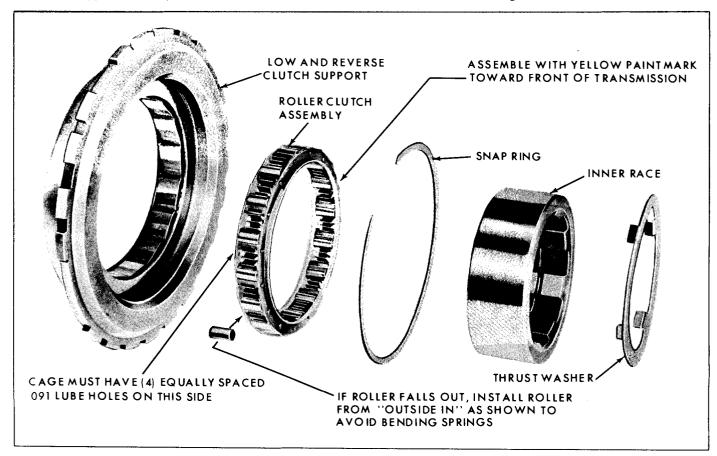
G-119 Exploded View of Low and Reverse Roller Clutch
